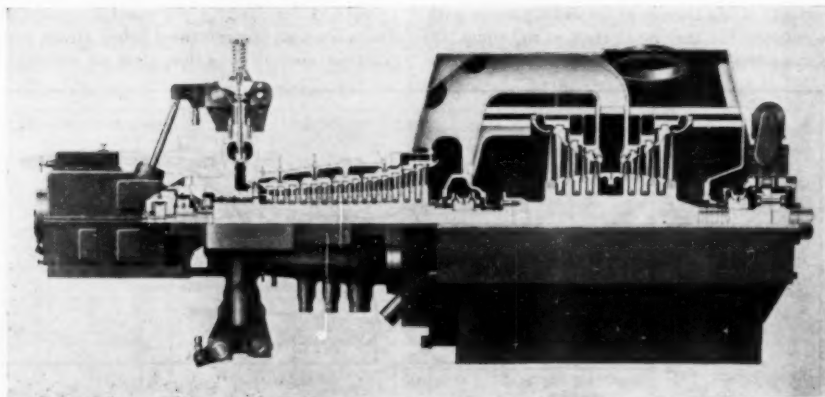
Martins Creek No. 1 turbine. Sectional view showing massive valve chests, bowl, and packing-hub sections.
